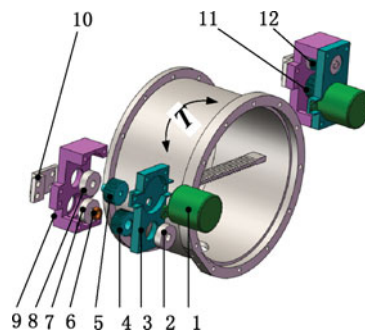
Stiffness regulating mechanism of vsaFGR. 1- Stiffness regulating motor, 2, 7, 8- Deep groove ball bearing, 3- Cover, 4- Passive gear on the left, 5- Active gear on the left, 6- Bushing, 9- Bracket, 10- Fitting (for slider), 11- Active gear on the right, 12- Passive gear on the right.
